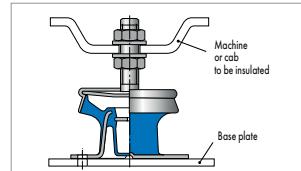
Fitting &amp; installation instructions: Hydro Mount DL
